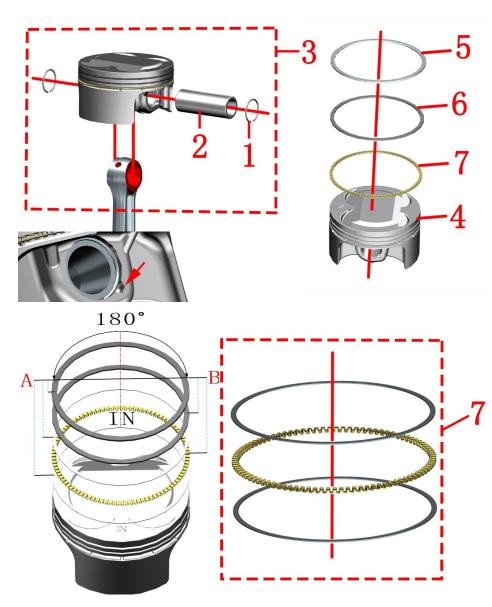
CYLINDER BLOCK		Piston assembly1	CHK
